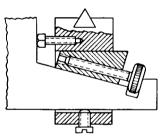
A knife-edge bearing is raised or lowered by a screw-driven wedge. Two additional screws position the knife edge laterally and lock it.
